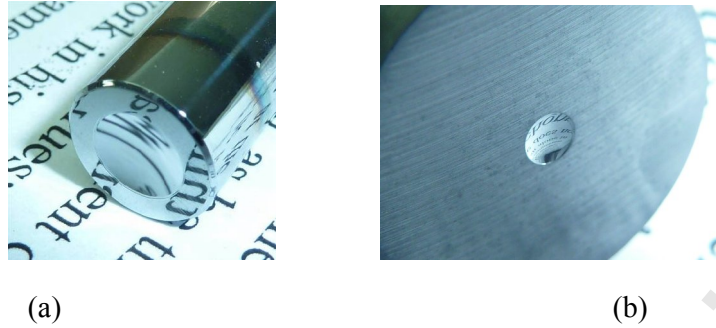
Optical images of the (a) 2 mm and (b) 6 mm moulds after single point inclined axis grinding, showing mirror surface finish.
